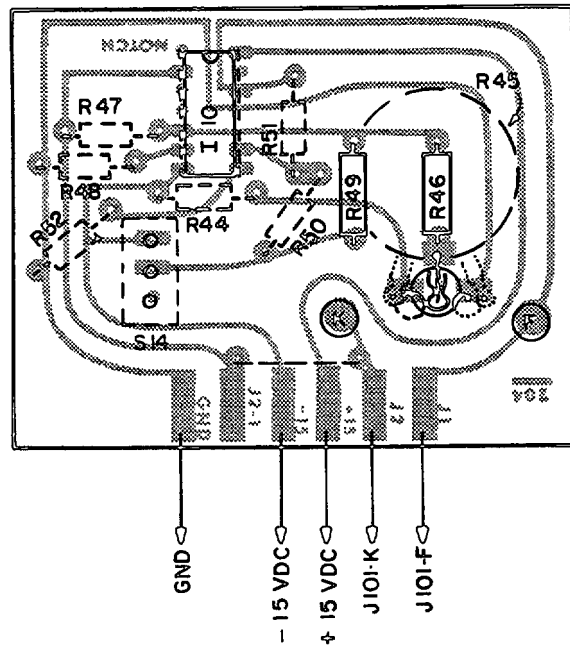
P.C. BOARD ASSEMBLY, BOARD 204, DRAWING
